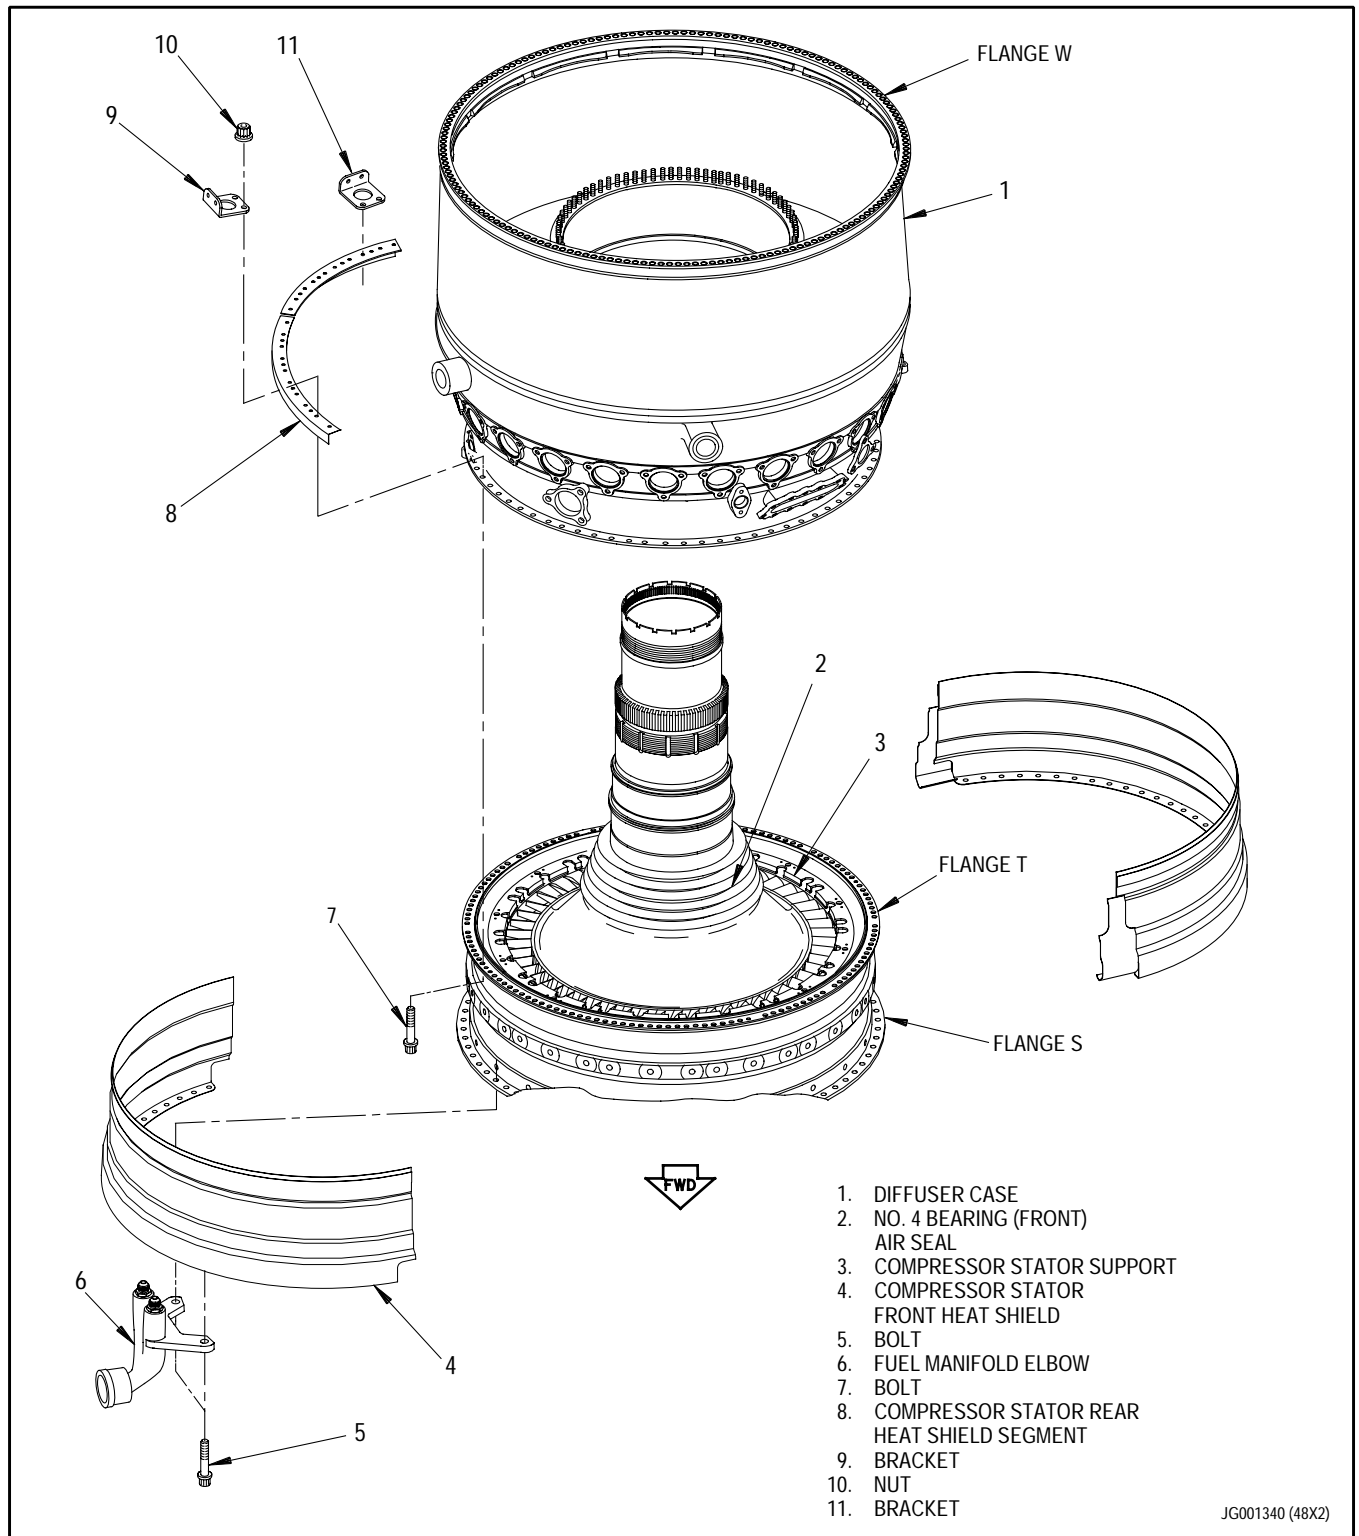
Diffuser Case and Compressor Stator Heat Shield - Removal
